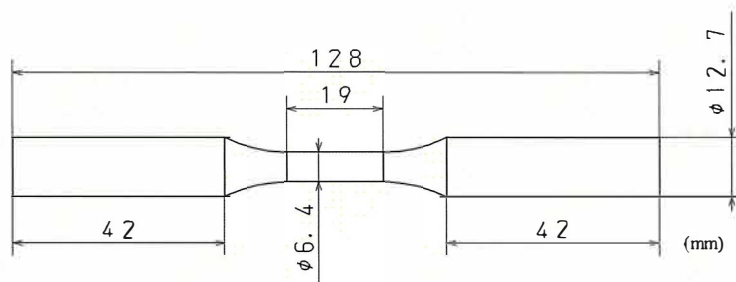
Transformation point measurement test piece shape and dimensions.
